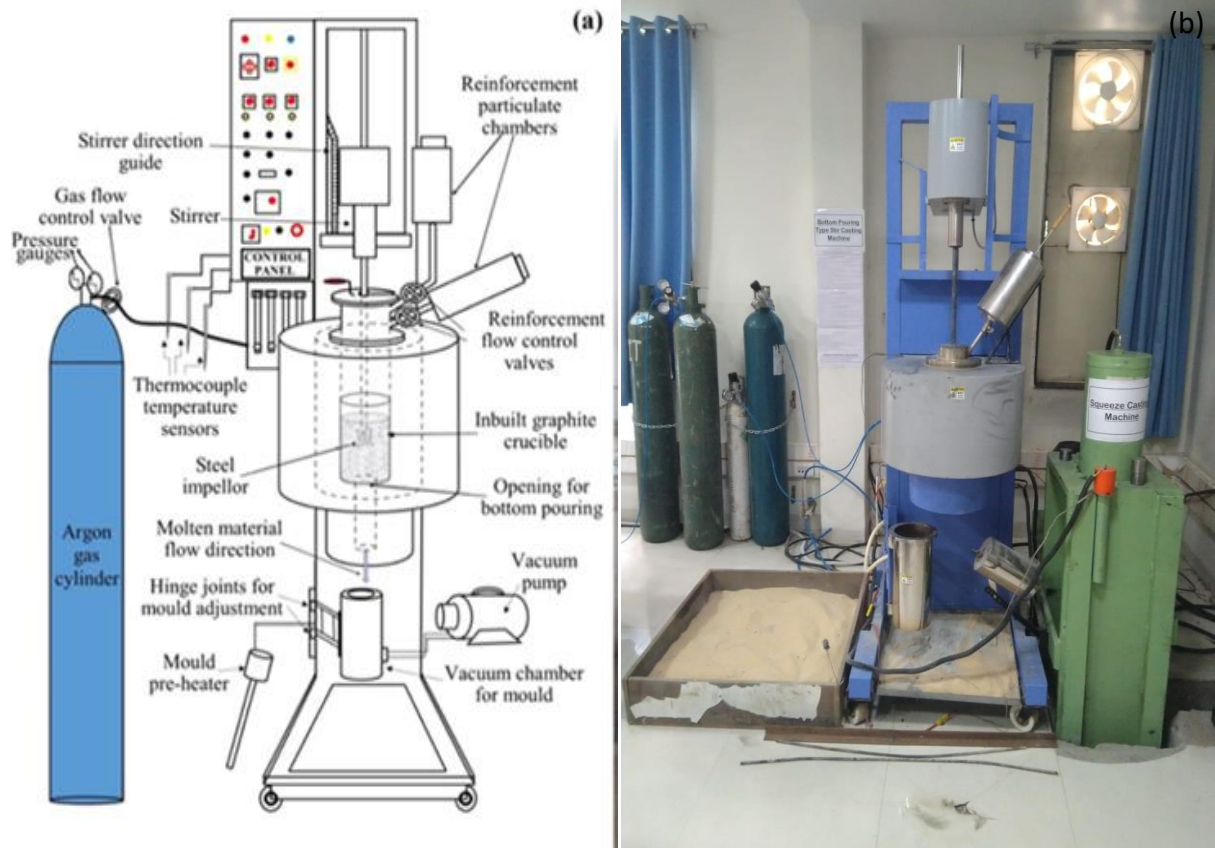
(a) Schematic diagram of gas injection bottom pouring vacuum stir casting[32] and (b) actual images of casting unit used for casting
